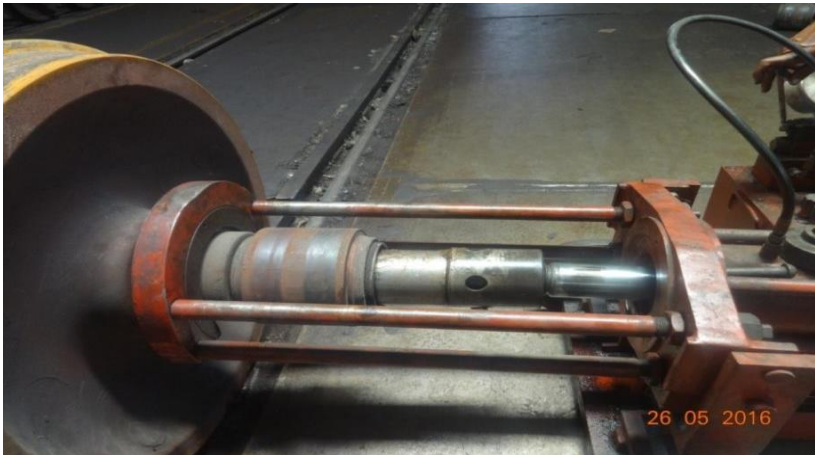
Position the bearing removal fixture on the bearing assembly to be removed by tilting the pulling frame.
